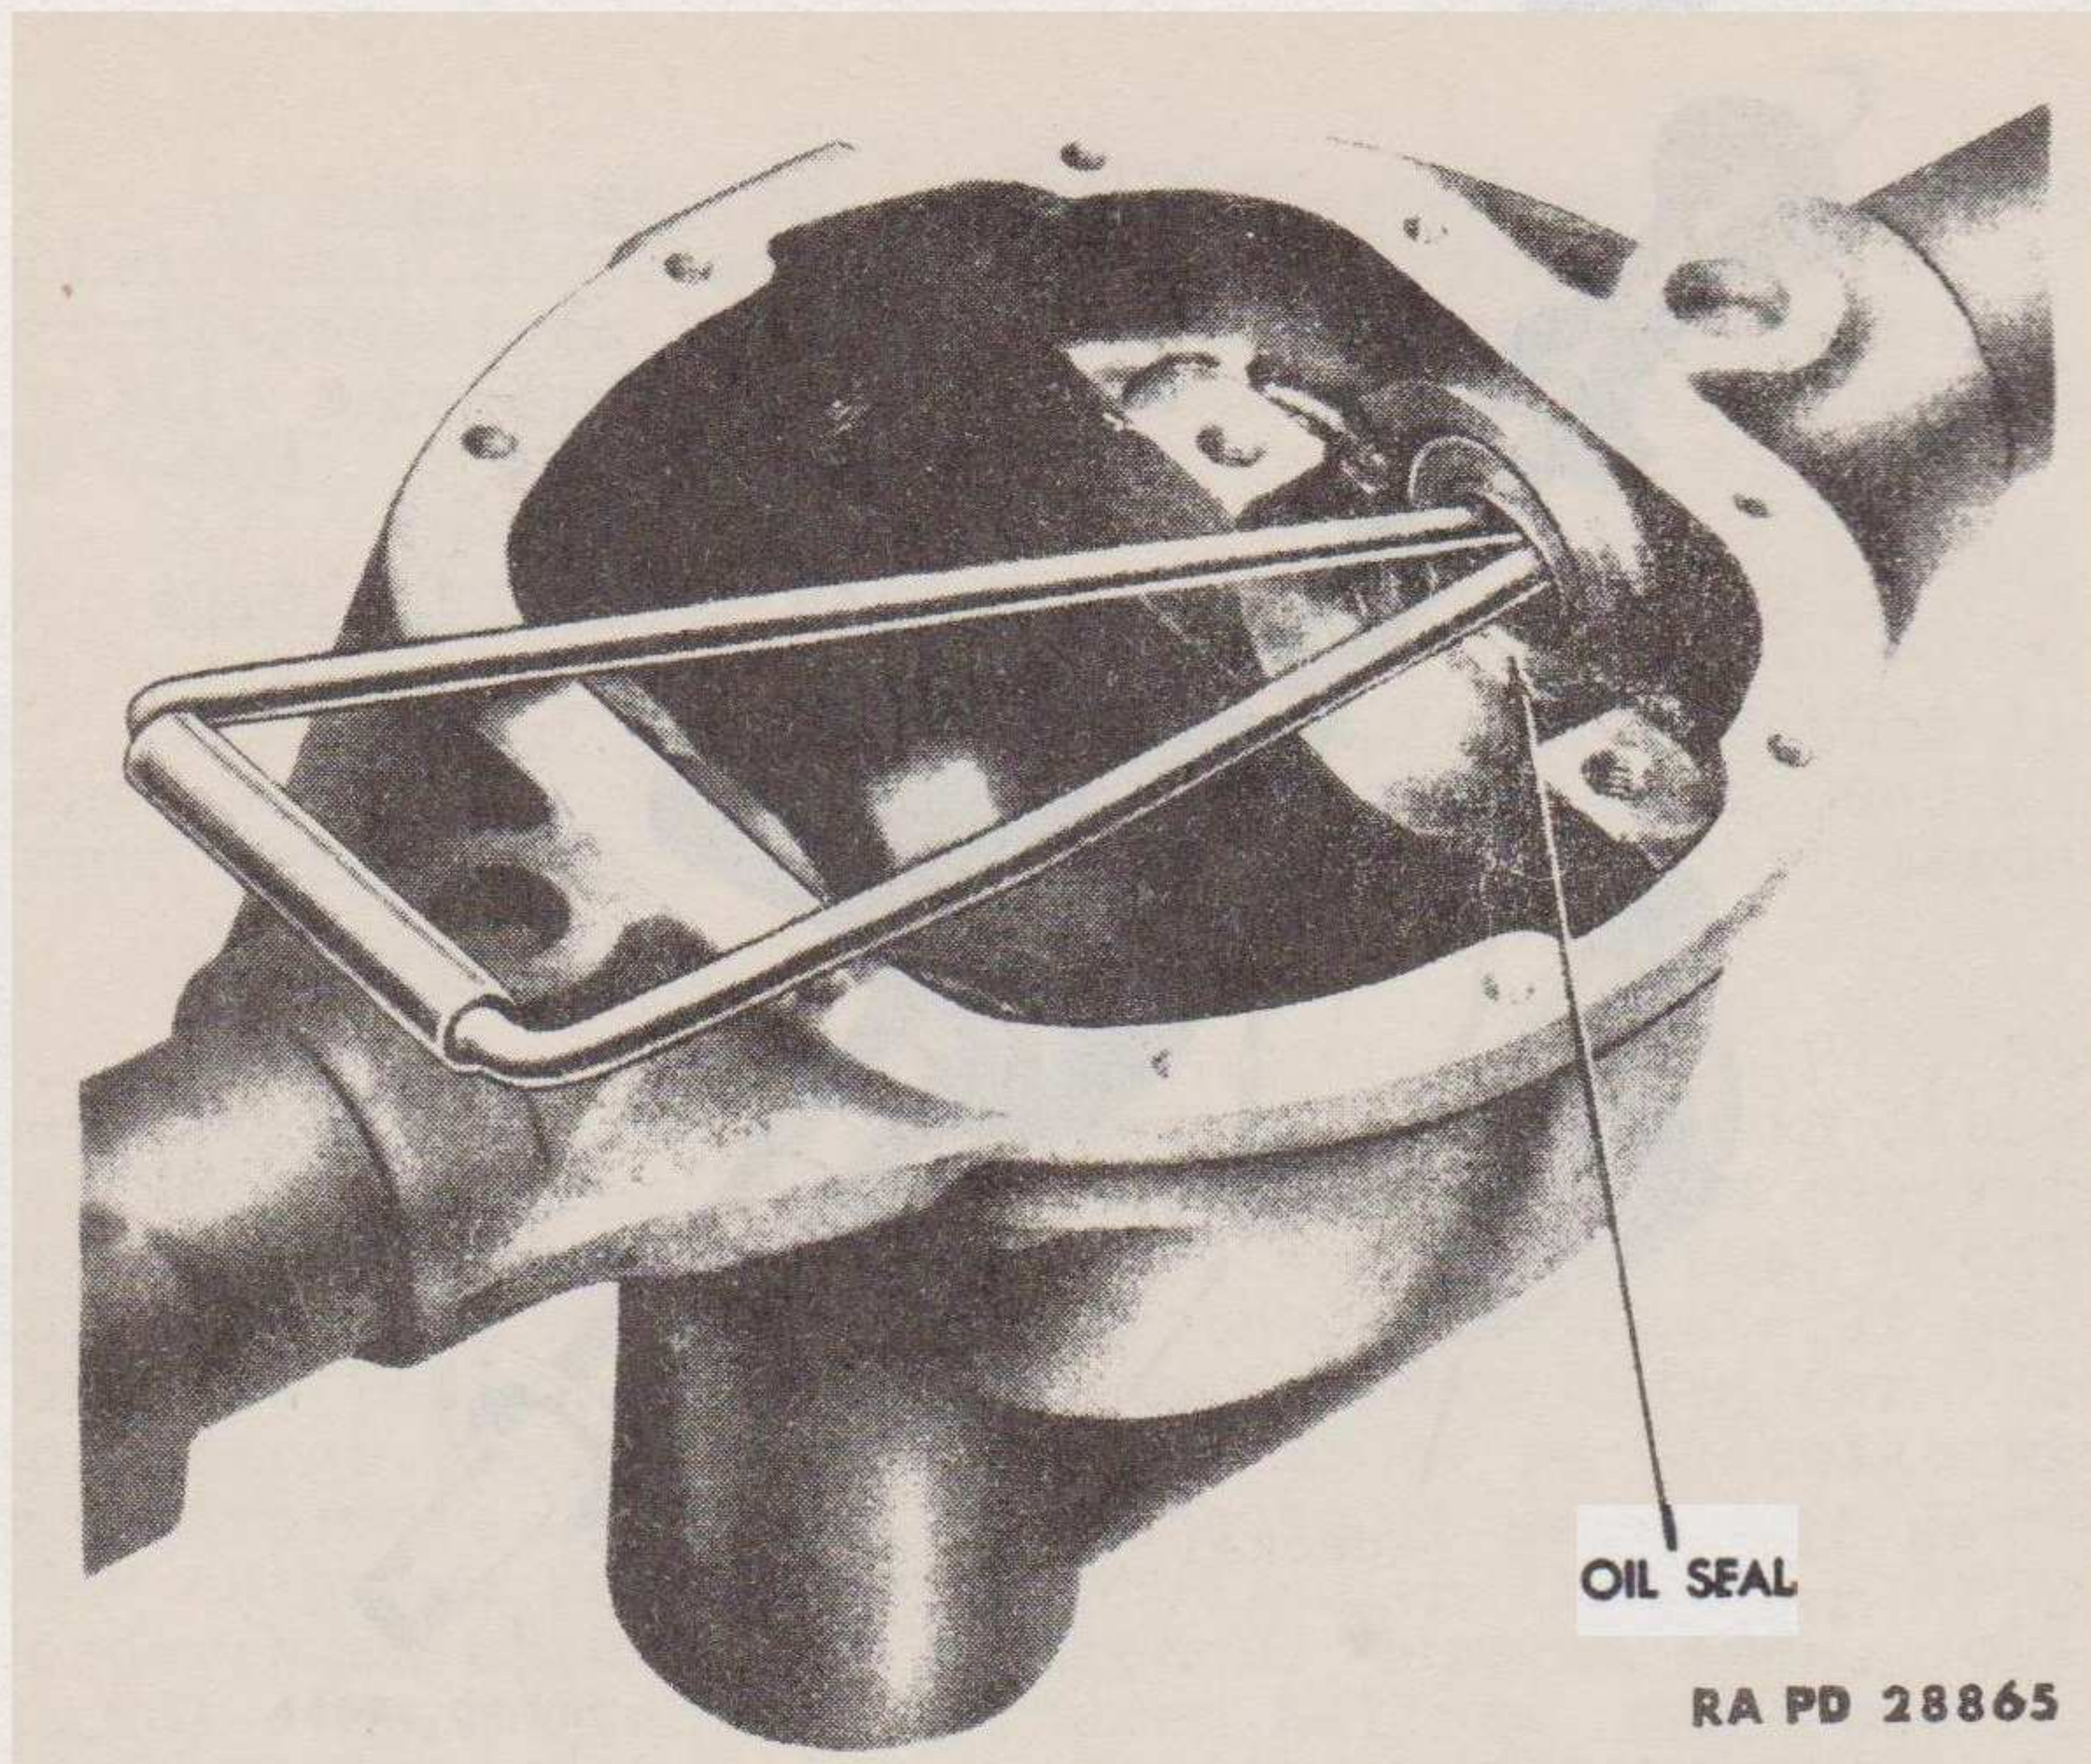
Removing Oil Seal From Axle Housing, With Remover 41-R-2384-38
